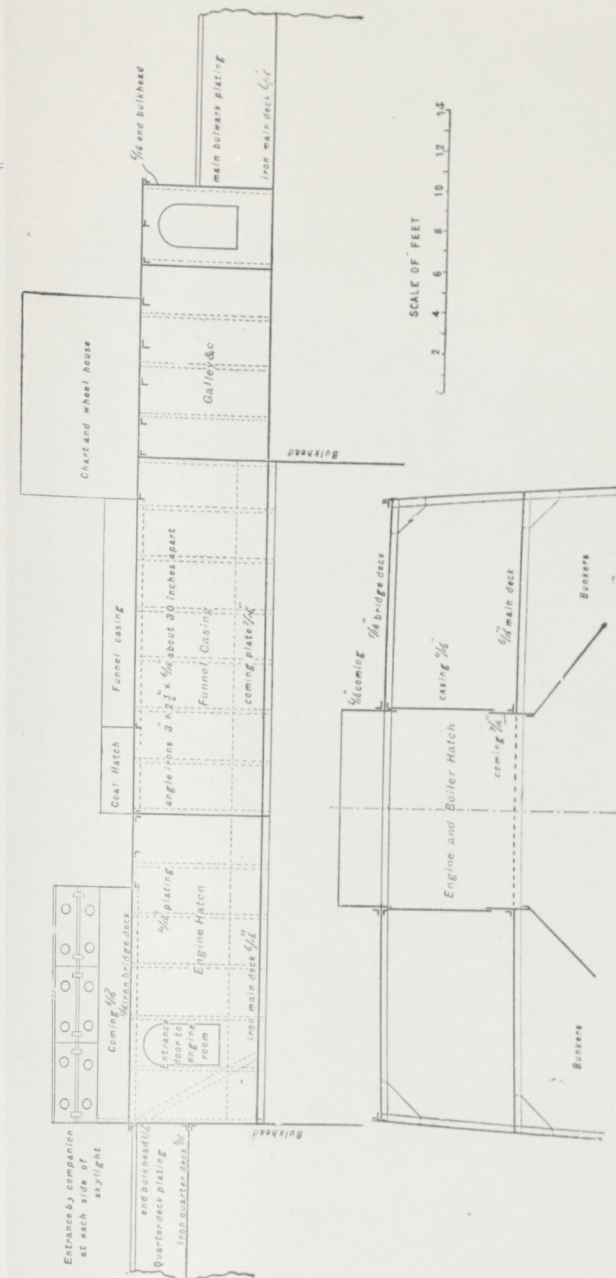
Sketch of Engine and Boiler Casing of a Three-decked Cargo Steamer, with Bridge Deck extending the whole length of the Openings.
